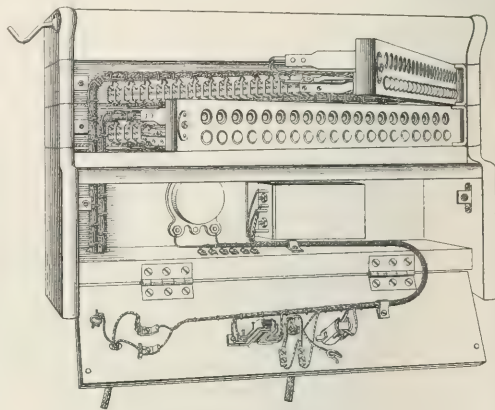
ARRANGEMENT OF WIRING AND SECTIONS
